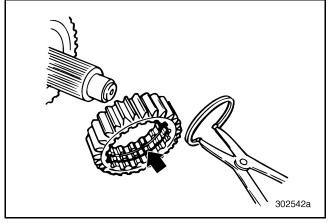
Removing Snap Ring Inside Fourth Speed Gear
